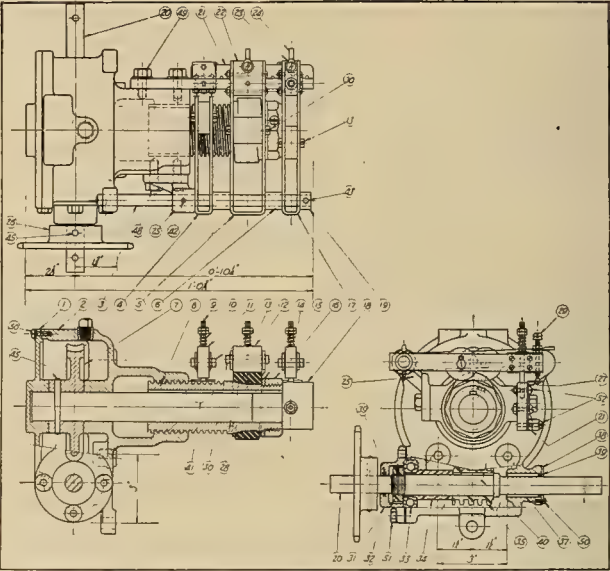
Showing the assembly of regulator head driving mechanism and cam switches.
